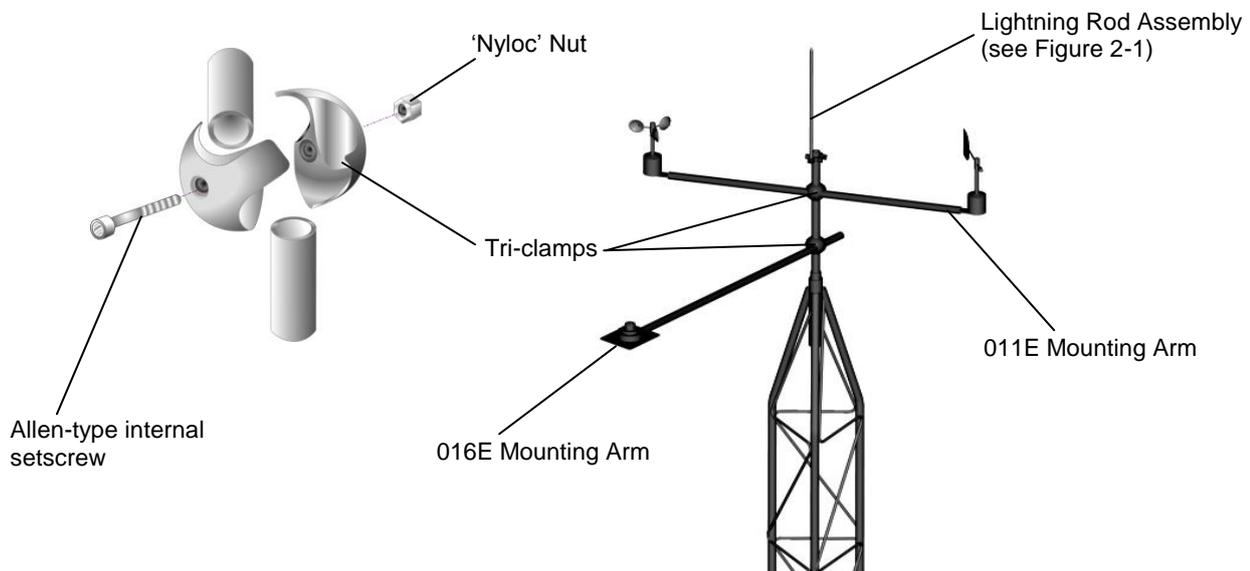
Both Mounting Arms and Sensors in Final Position on the Tower Mast Assembly
